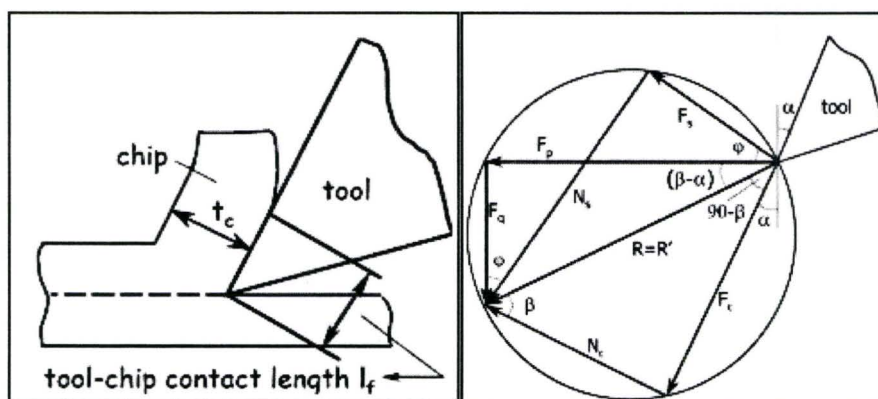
(a) Tool-chip contact in cutting (b) Merchant's circle
